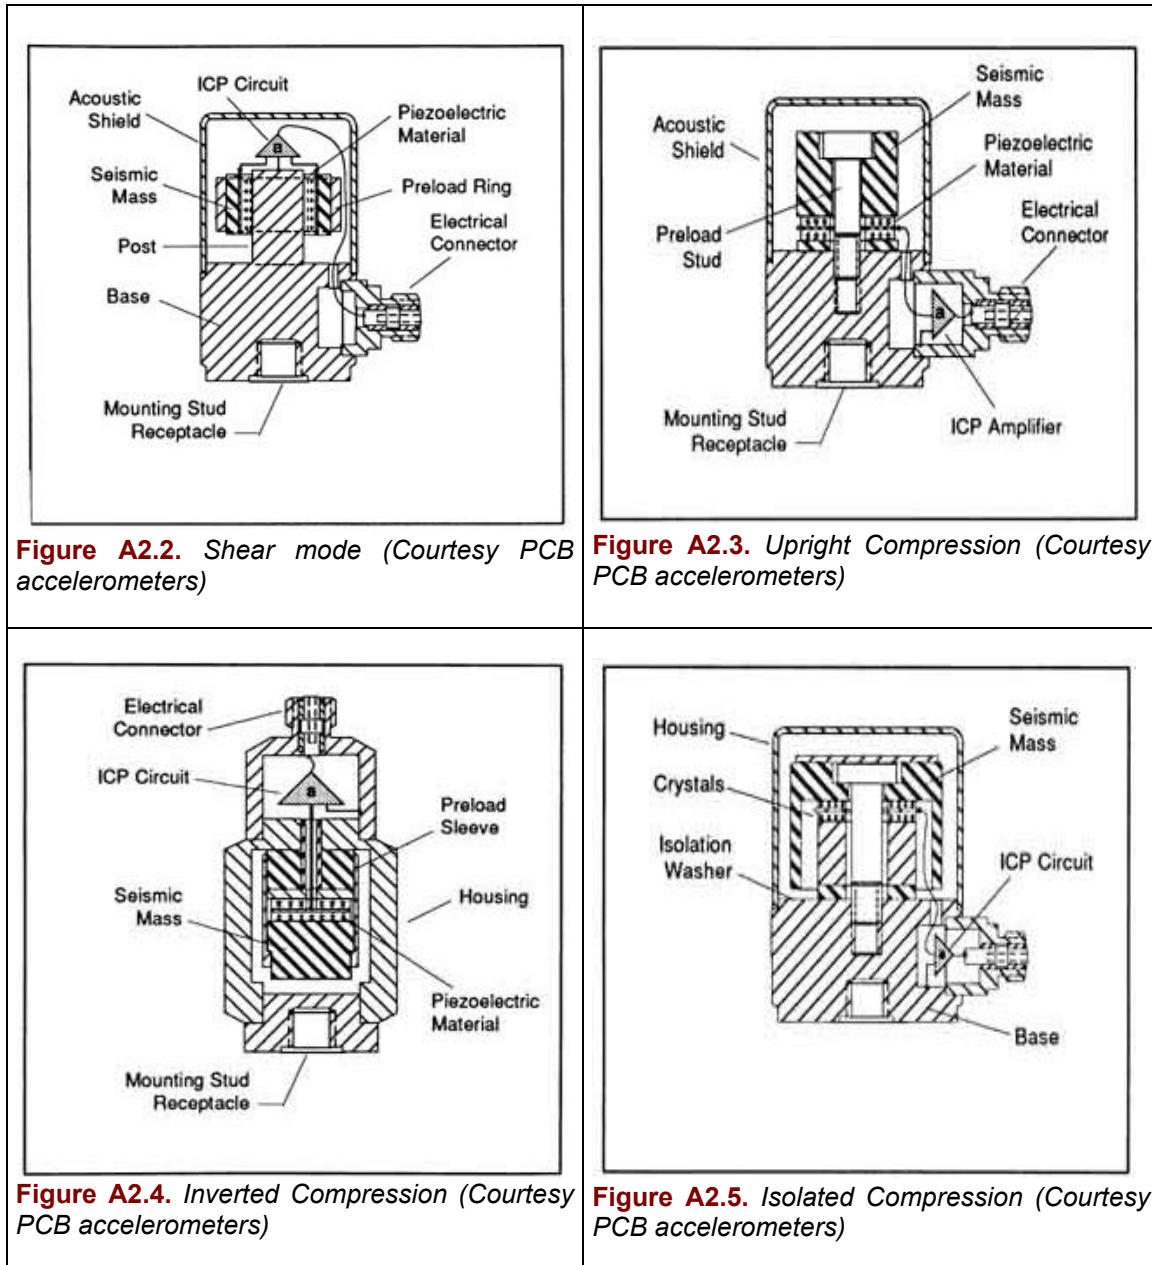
Shear mode (Courtesy PCB accelerometers)
